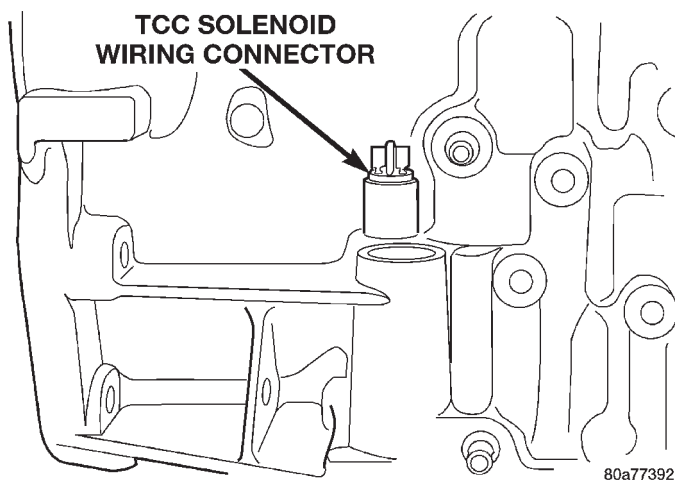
Torque Converter Clutch Solenoid Wiring Connector
